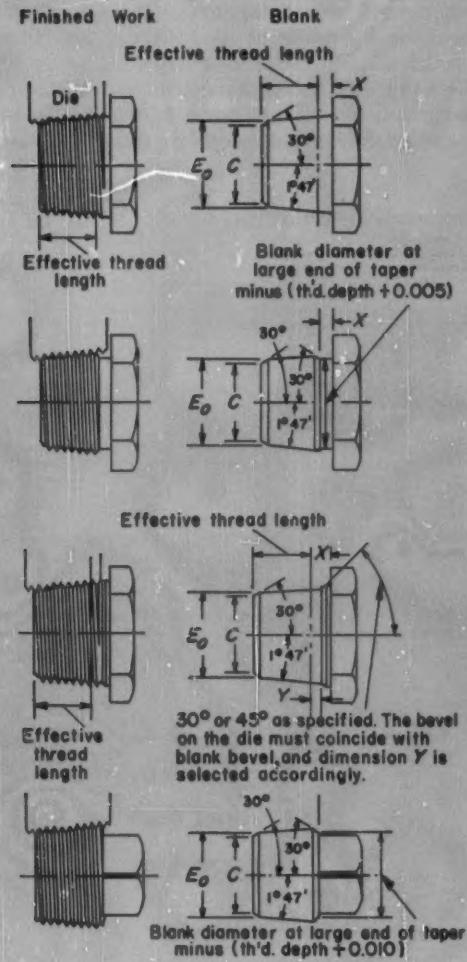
Blank design for taper pipe threads. Values of dimensions X and Y are given in Table 6
